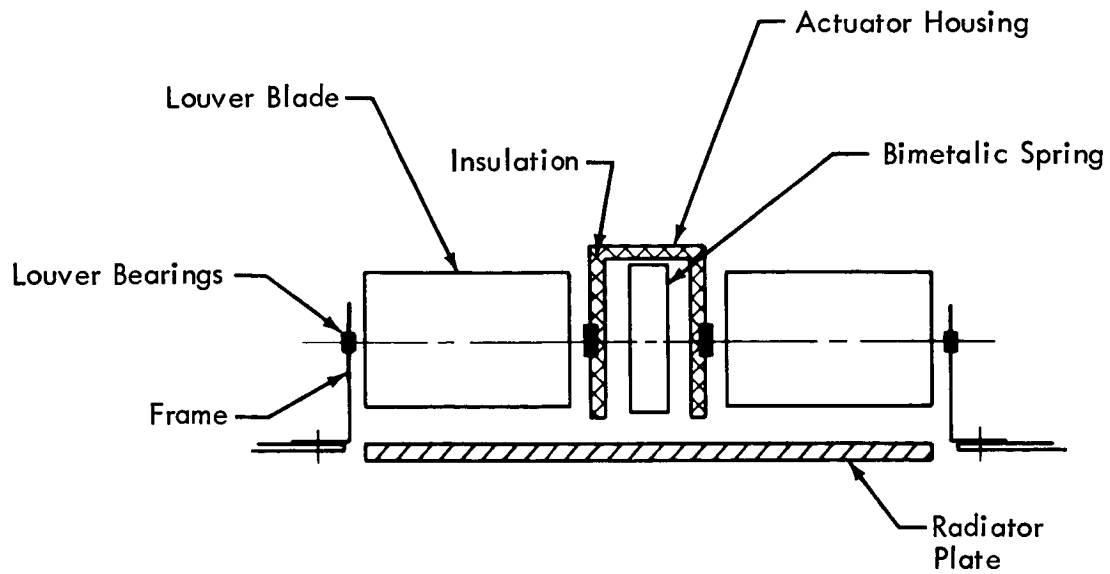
RADIATOR-LOUVER ASSEMBLY SCHEMATIC
